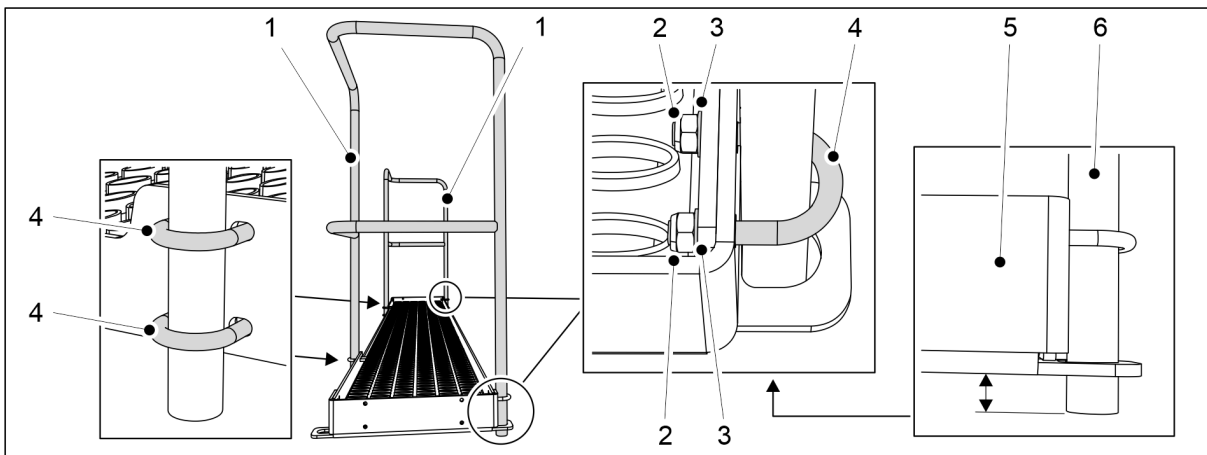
84. Mounting handrails on a 400 machine
